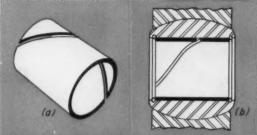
Plastic "strip" bearing, a, is cut from sheet, strip, or tubing stock. Position of strip bearing, installed in housing, b, is maintained by retainer rings.
